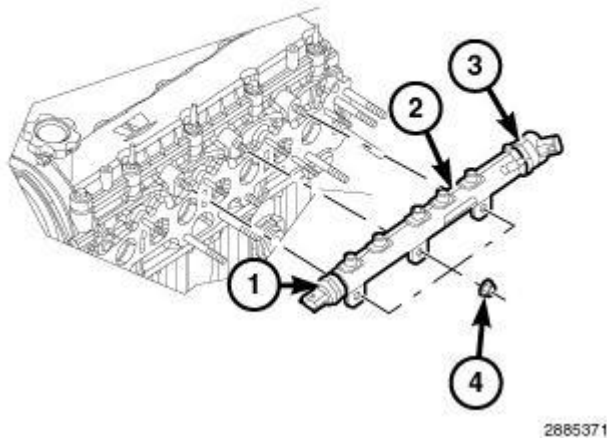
Fuel Rail Pressure Sensor, Fuel Rail, Pressure Solenoid & Nuts
